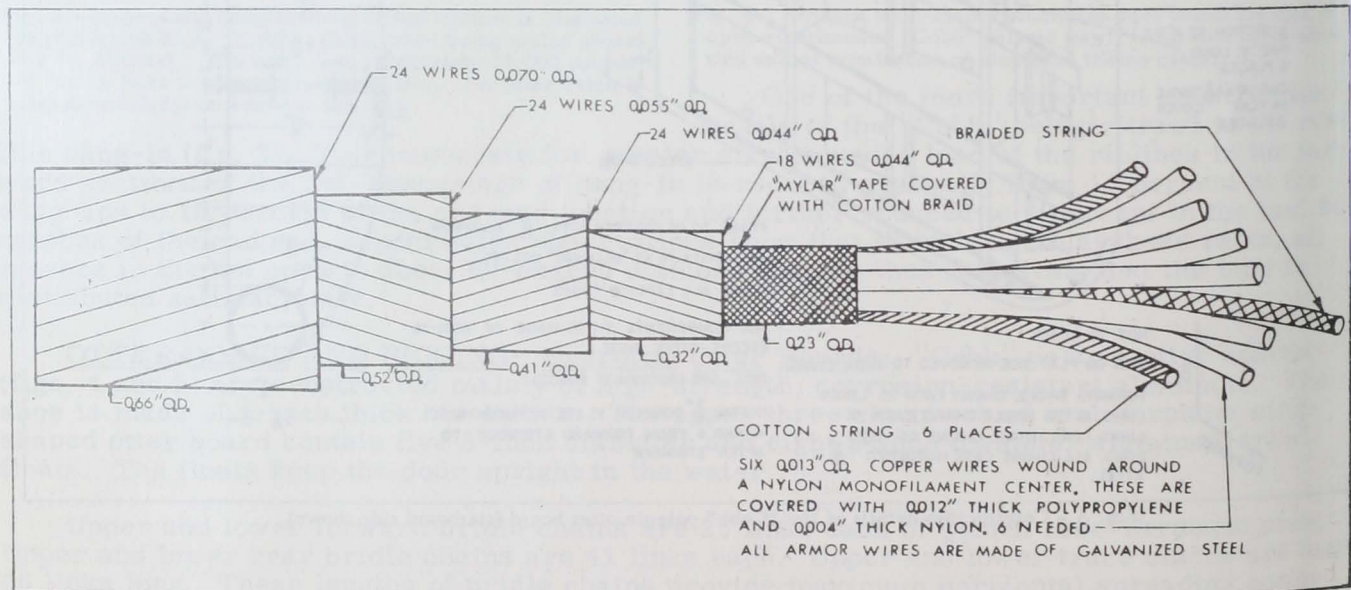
Scale drawing of the electrical towing cable shows the 4 layers of steel armor and 6 insulated conductors.
